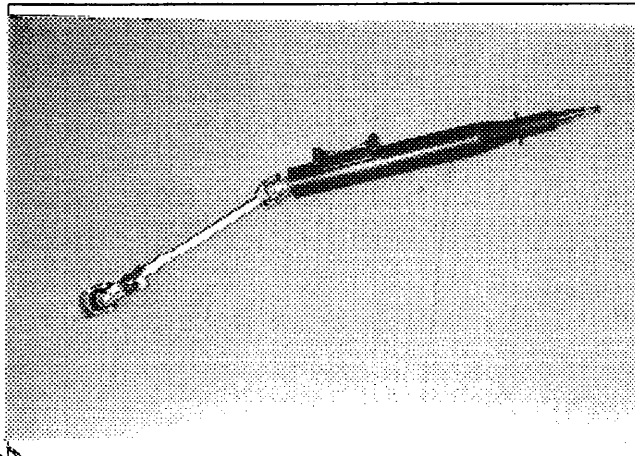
REINFORCED STEERING COLUMN TYPE C
